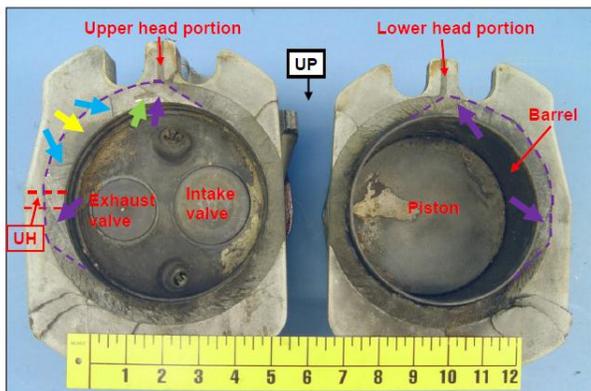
The mating fracture faces on the upper (left) and lower (right) portions of the cylinder head.
